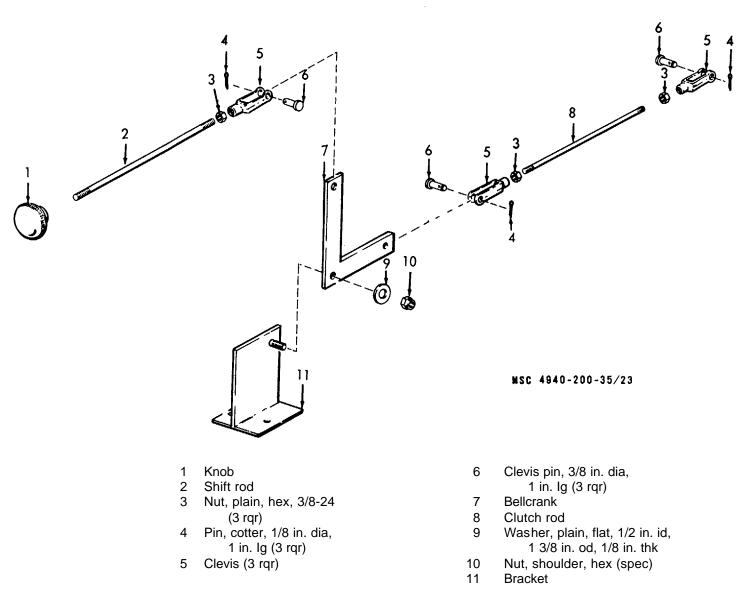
Power takeoff upper linkage, model CMU-5, disassembly and reassembly.
